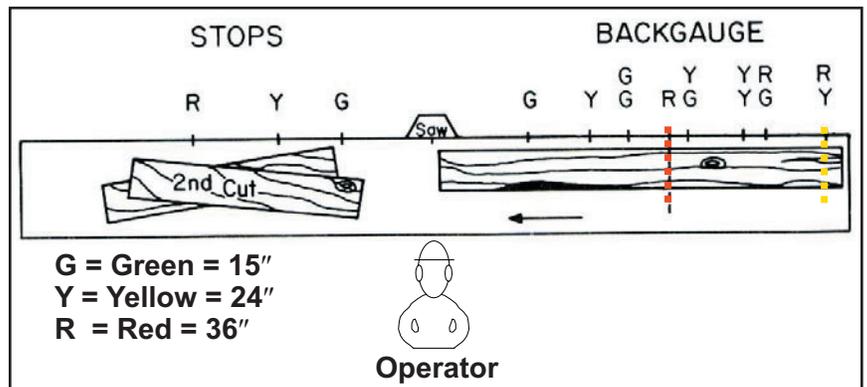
Using the backgauge, the crosscut operator can minimize end trim loss by cutting a 36-inch (red) and 24-inch (yellow) section from the remaining board length.
